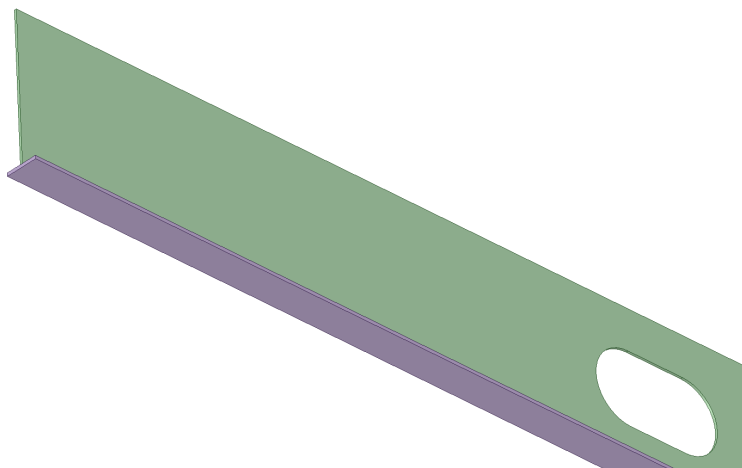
Typical T-beam girder consisting of separate web and flange plates
